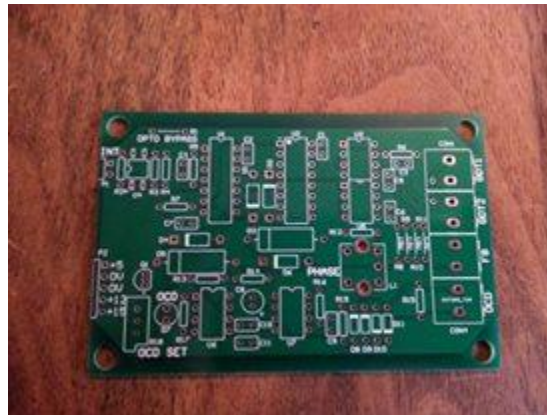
Vermonster Mini driver PCB (Revision 01)
